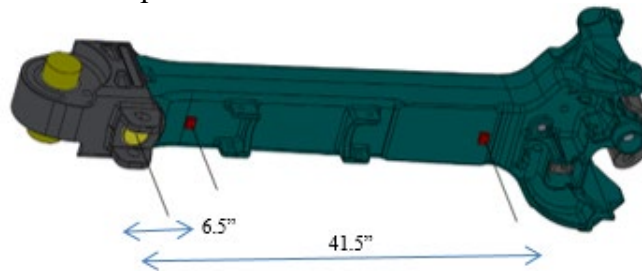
Tilt Sensor Locations – Coupler Failure Test
